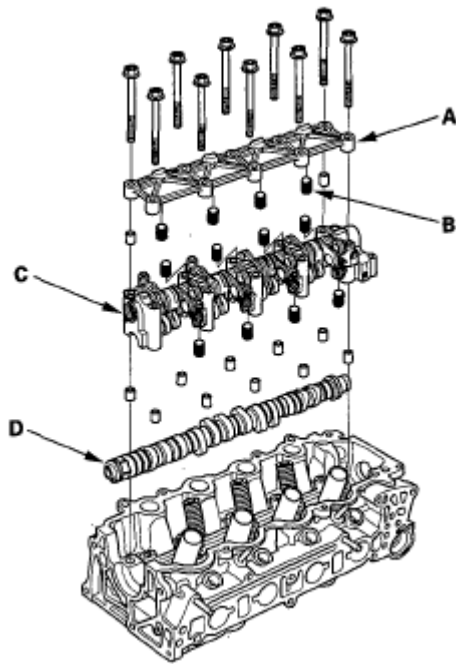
Identifying Lost Motion Holder, Lost Motion Assembly & Rocker Arm Assembly & Camshaft
